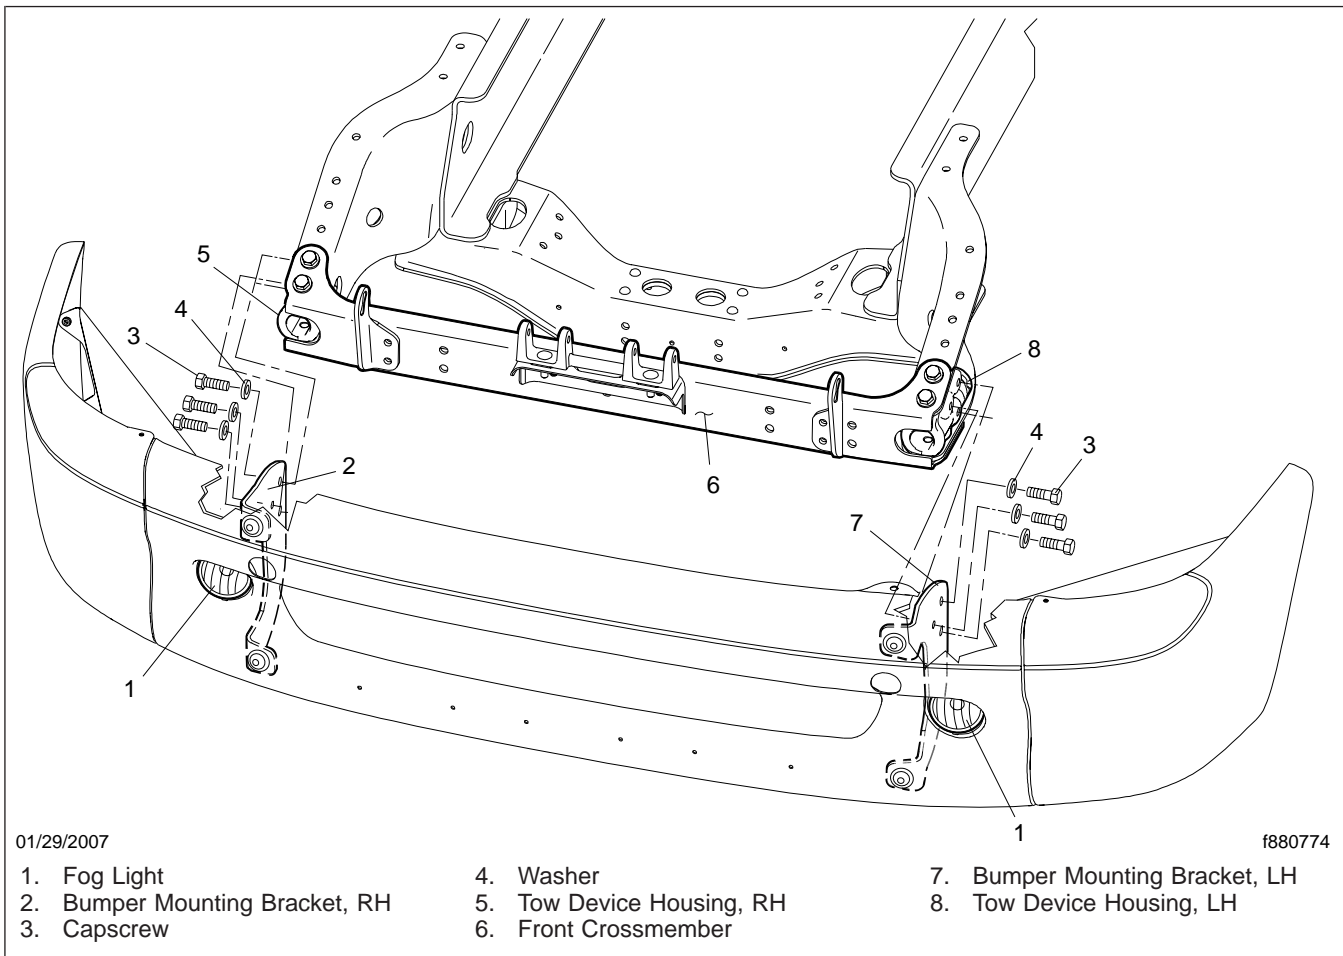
, Removal and Installation, Bumper and Bumper Mounting Bracket
